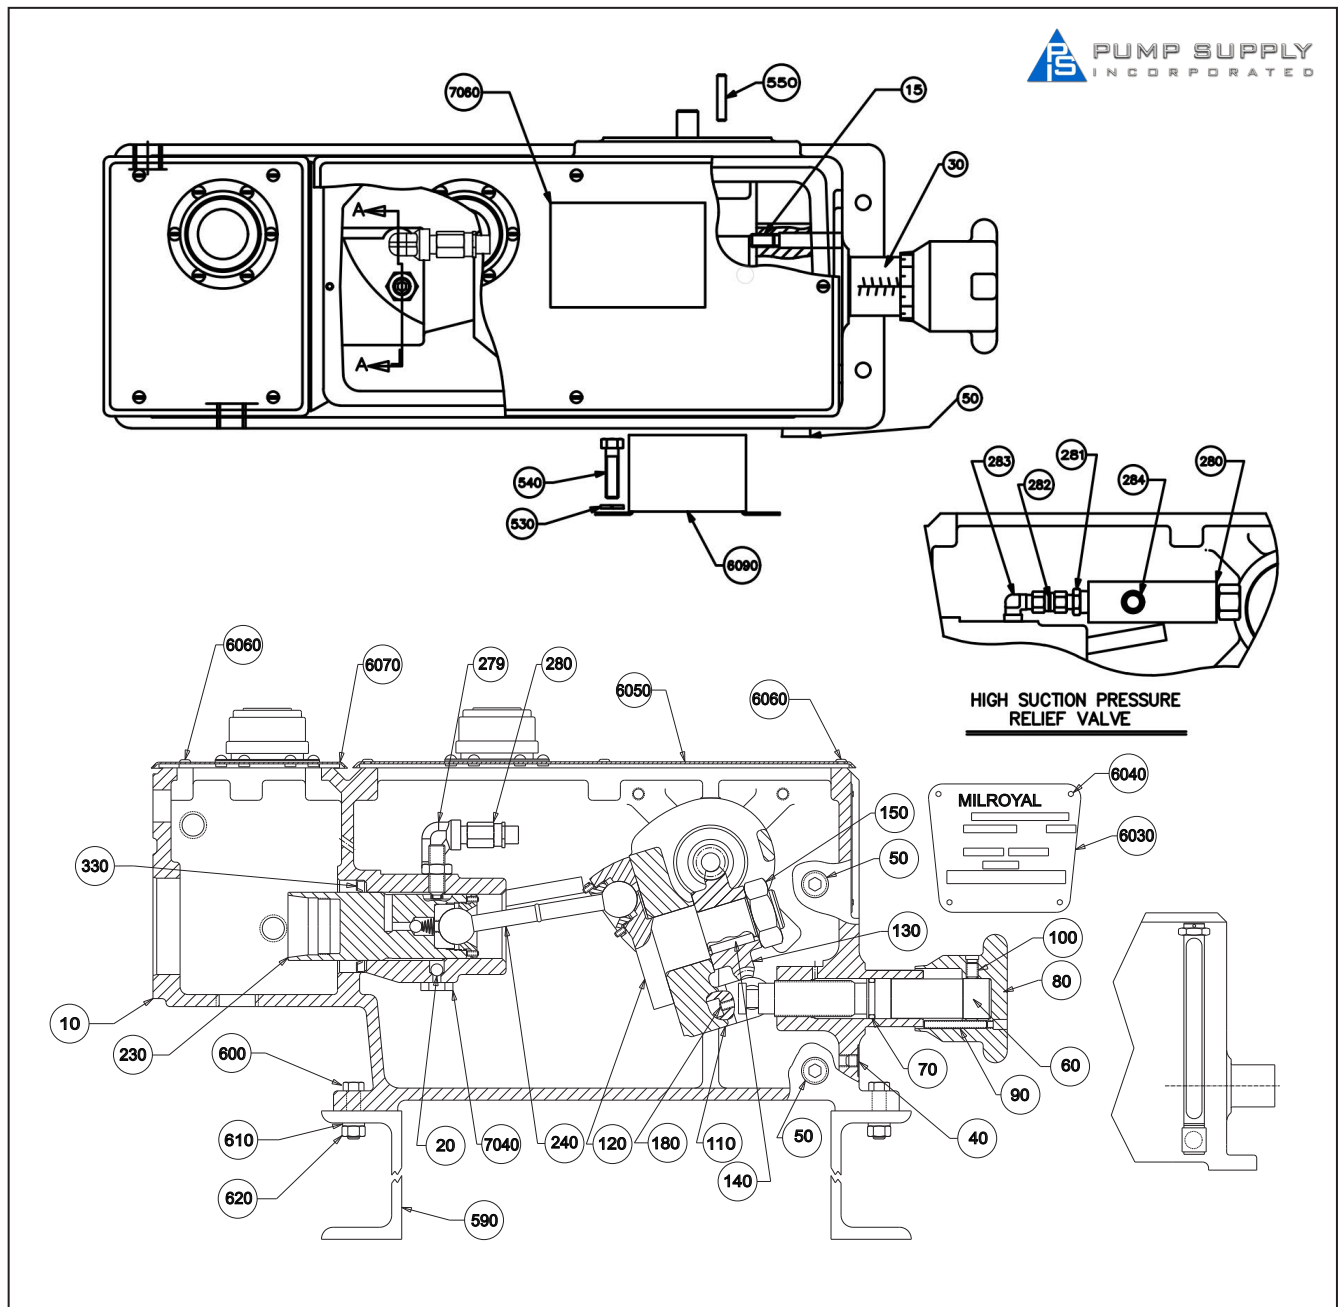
Drive Side and Top Views (DWG 102-2095-000)(Sheet 2 of 2)
